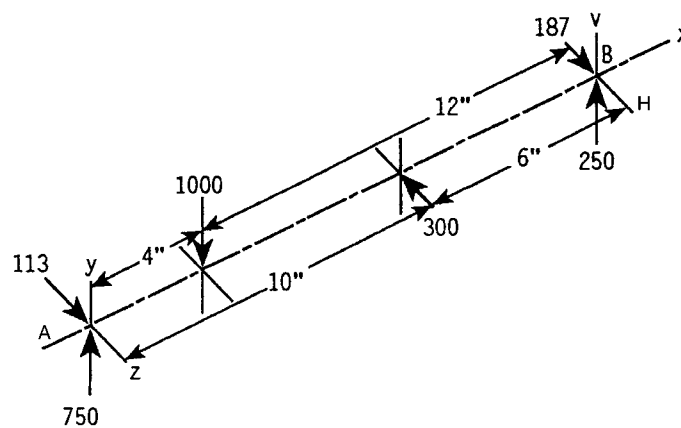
A shaft carries two spur gears between bearings A and B. The gear loads and reactions are shown.
